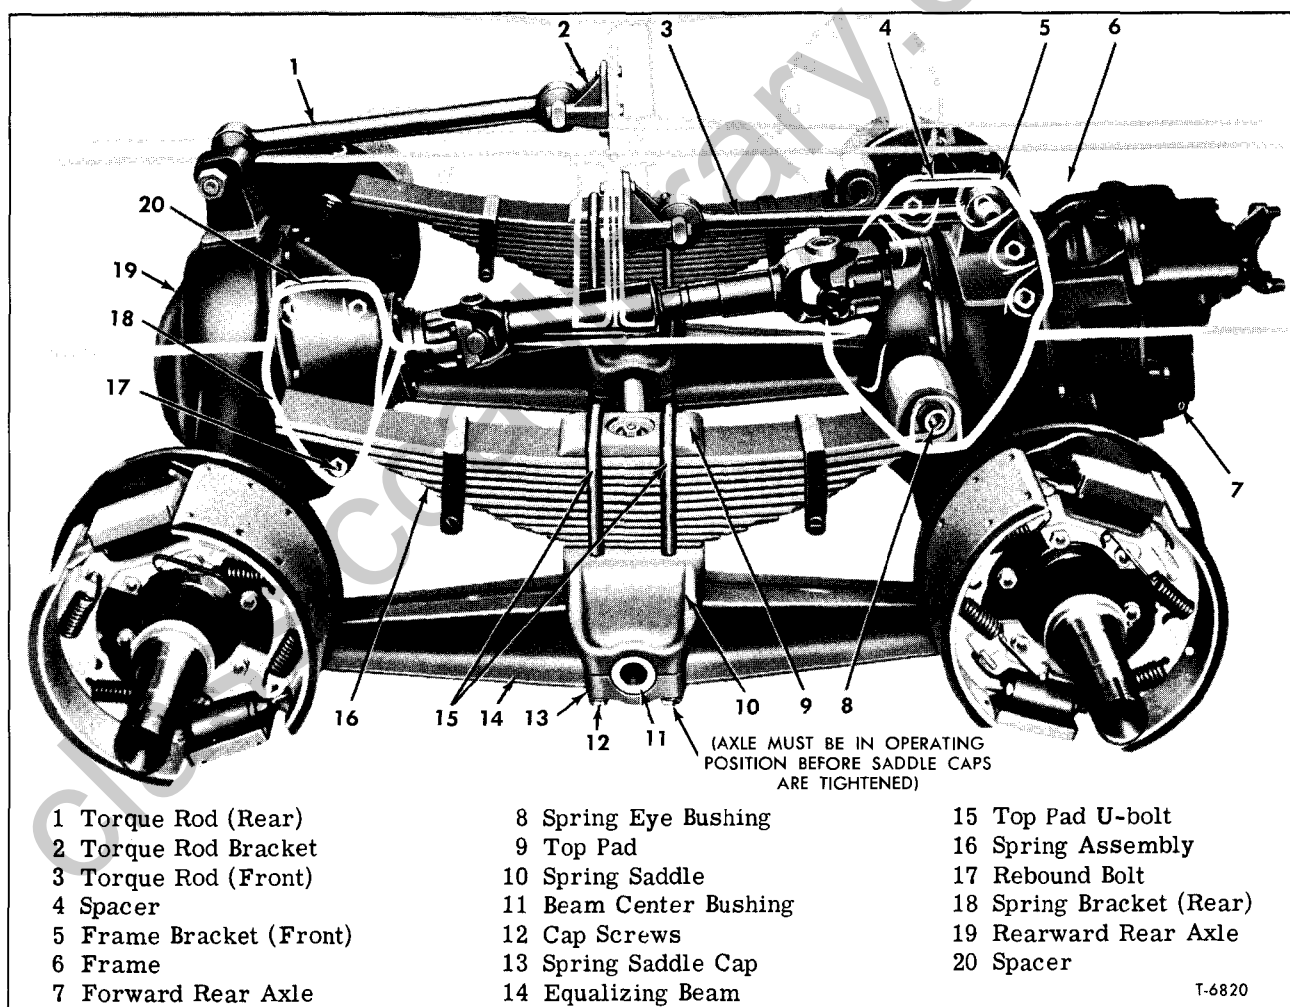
Tandem Rear Axle Suspension (Hendrickson RU) (Typical)
